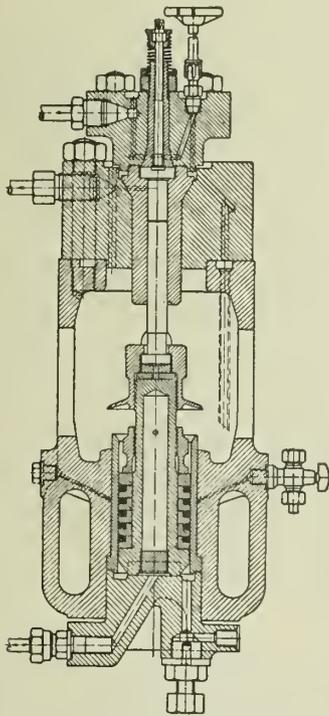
Section through the Injection Pump—Archaouloff-Krupp Diesel Engine.
